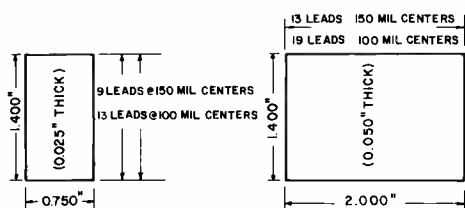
Standard package sizes for high-speed magazine manufacturing via the "railroad-tracks" system.
